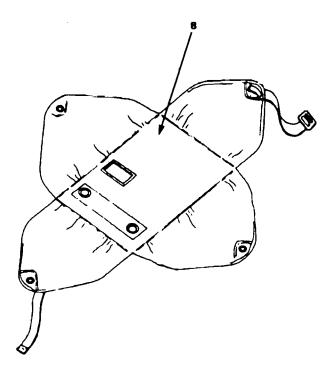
Parachute Assembly (Sheet 3 of 3)
